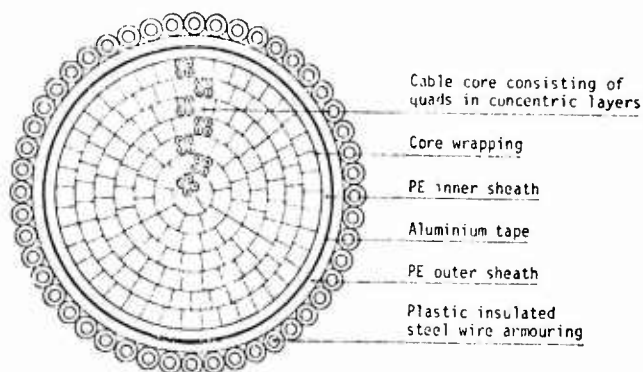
Cross section of a 150x4x0,5 mm cable.
